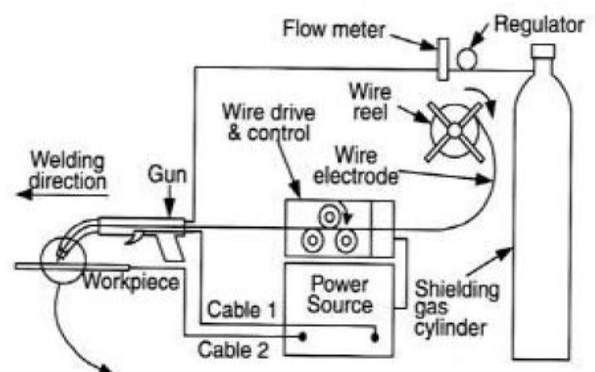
Schematic diagram of MIG welding Equipment Arrangement
